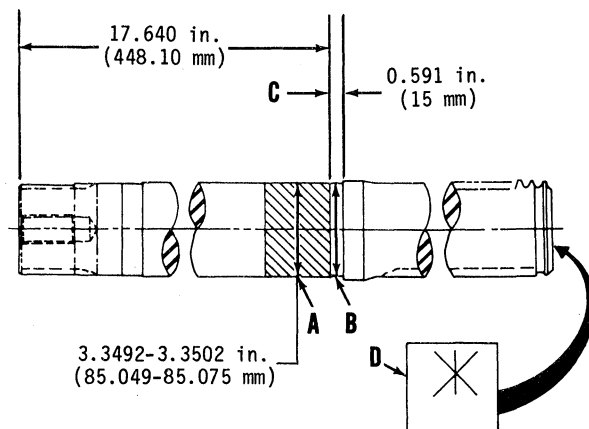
On Models 4050 and 4250, axle shaft may be modified for installation of undersize outer bearing. Refer to text for details.
